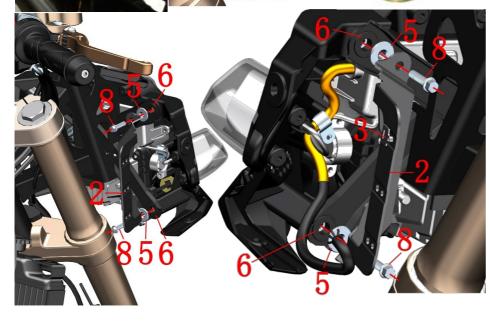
FRONT FORK		Motor controller, headlight assembly	CHK	0
